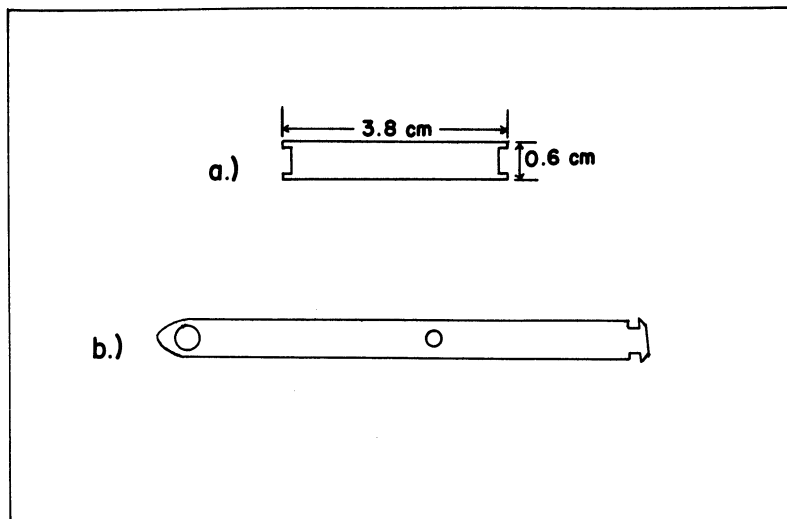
Two components of the roto-bar sampler. (a) The sampling bar. (b) Phosphor-bronze spring holder for the sampling bar.
